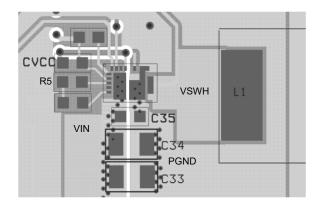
Top Layer of PCB Layout (VIN, VSWH and PGND Copper Planes)
